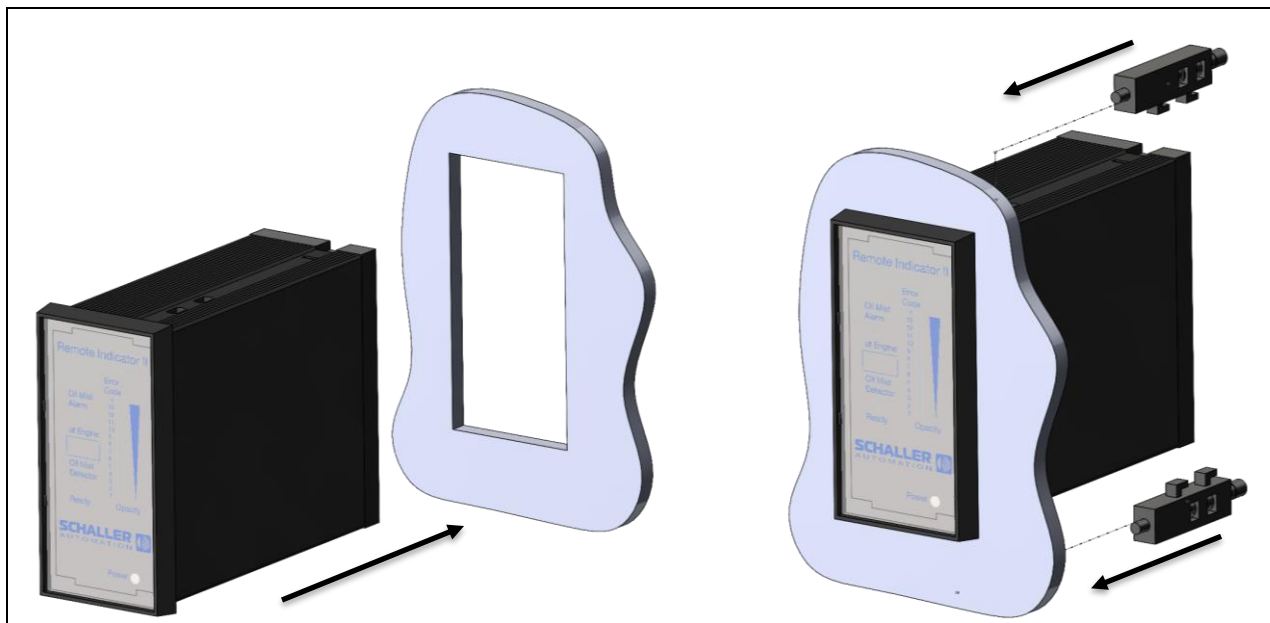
Insert the Remote Indicator II into the slot and push the holding clamps on the device
